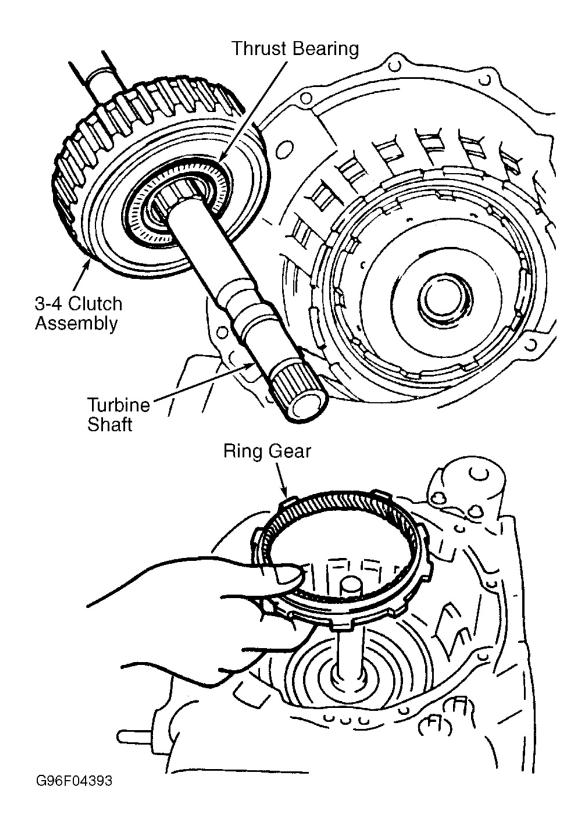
Installing Turbine Shaft, 3-4 Clutch Assembly & Ring Gear
